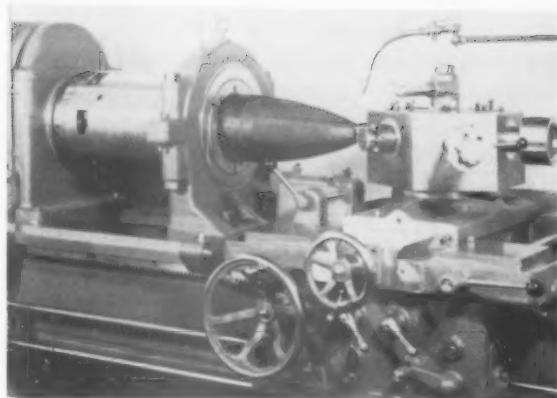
A large air-operated collet chuck is gripping a 240 mm shell while the nosing operations are being performed. Courtesy of Sidney Machine Tool Co.
